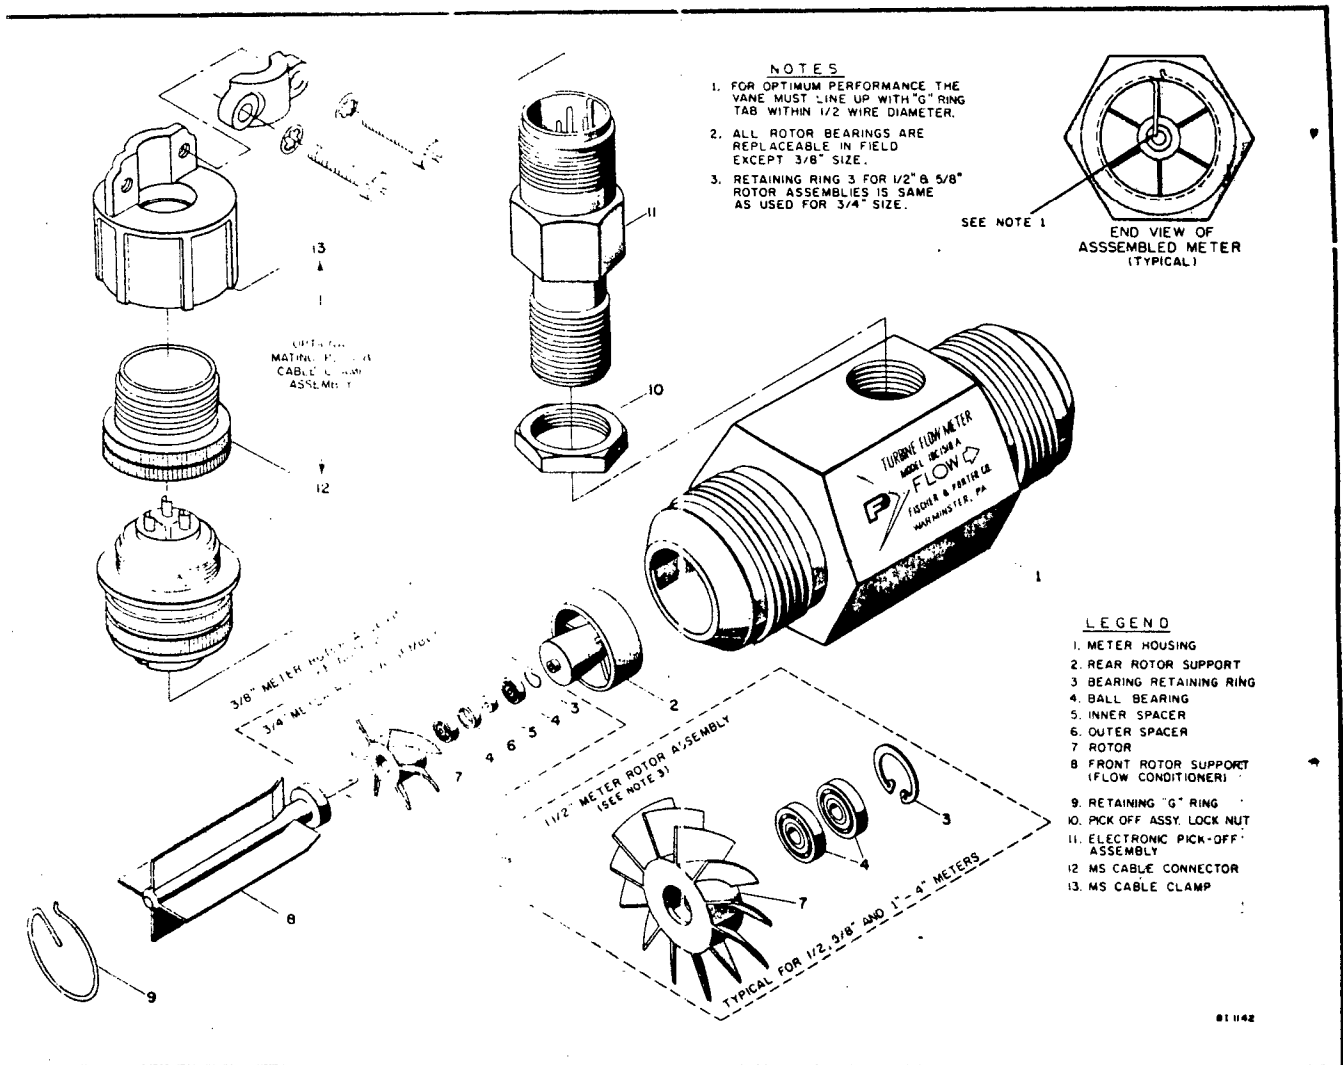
EXPLODED VIEW OF TURBINE FLOWMETER (3/8" THRU 4" SIZES)
